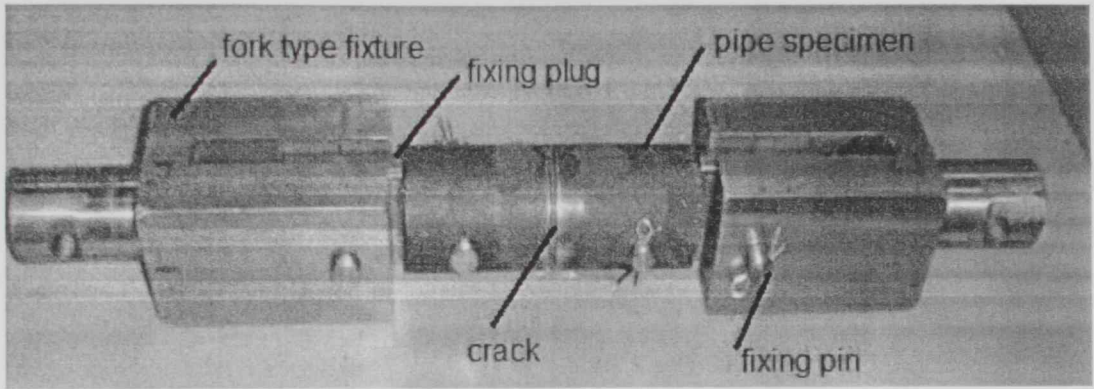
Fork type fixtures assembled with pipe specimen using pins.
